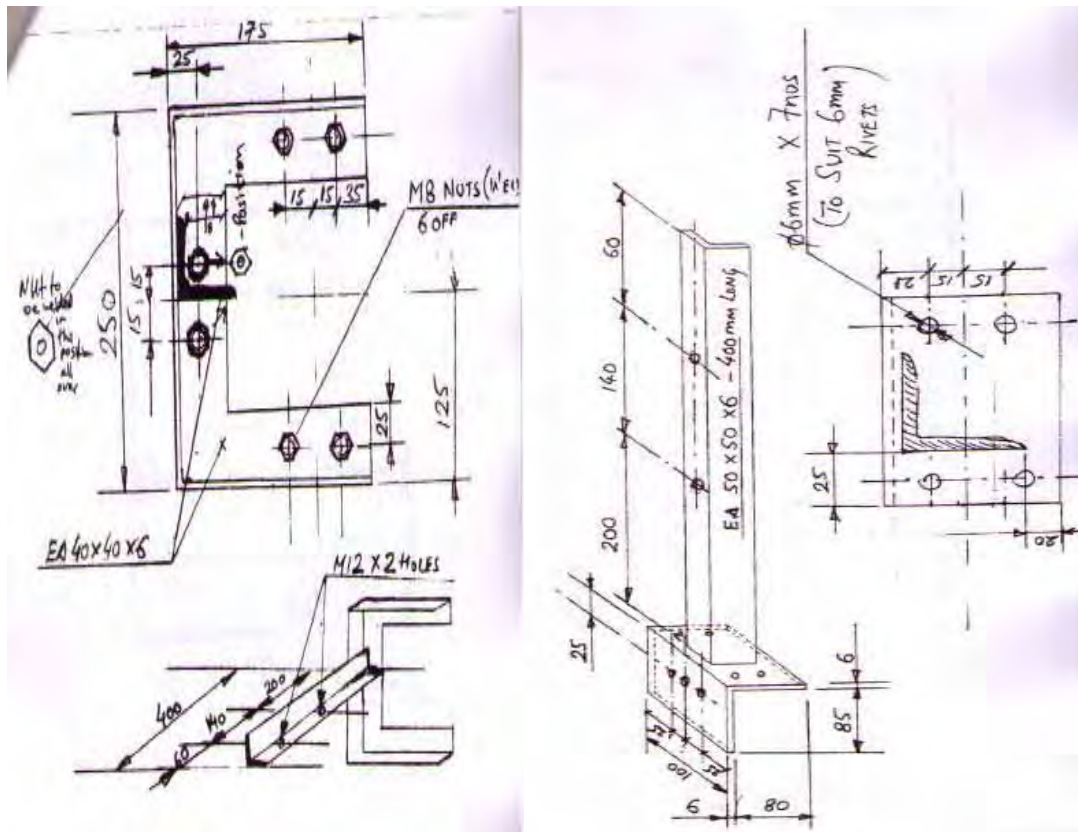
Special jigs engineered to allow marrying up of bolts from outside of mullions to connect through to internally fabricated brackets.
